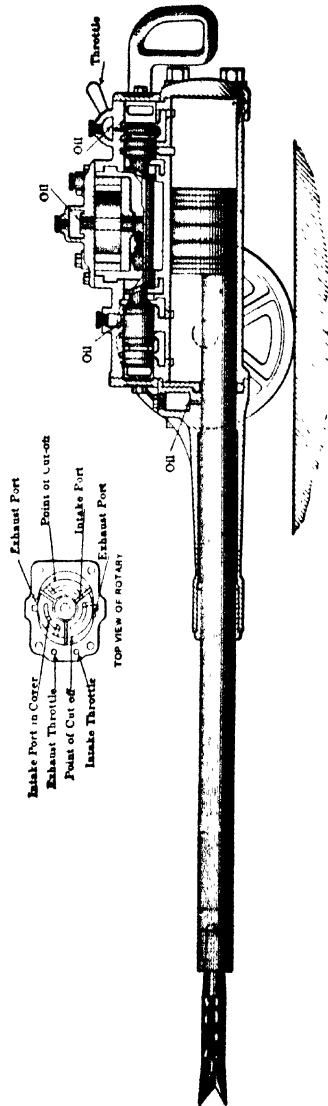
Harrison Pick Machine (Types PG and PW).
